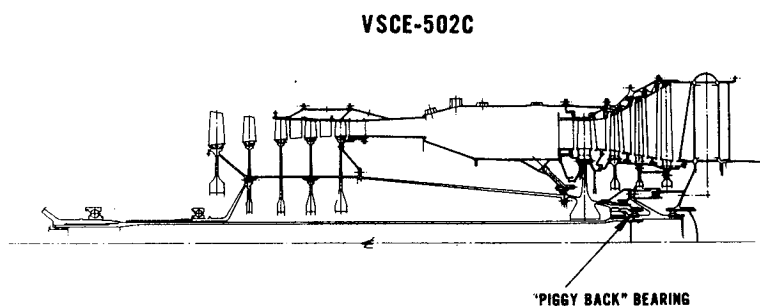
Alternate High Spool Bearing Arrangement for VSCE-502C
